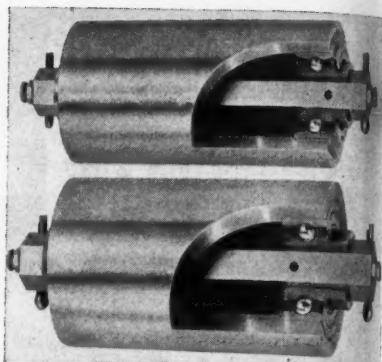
Mathews 4½-In. Diameter Roller with Type 63SB Bearing for Roller Conveyor.
